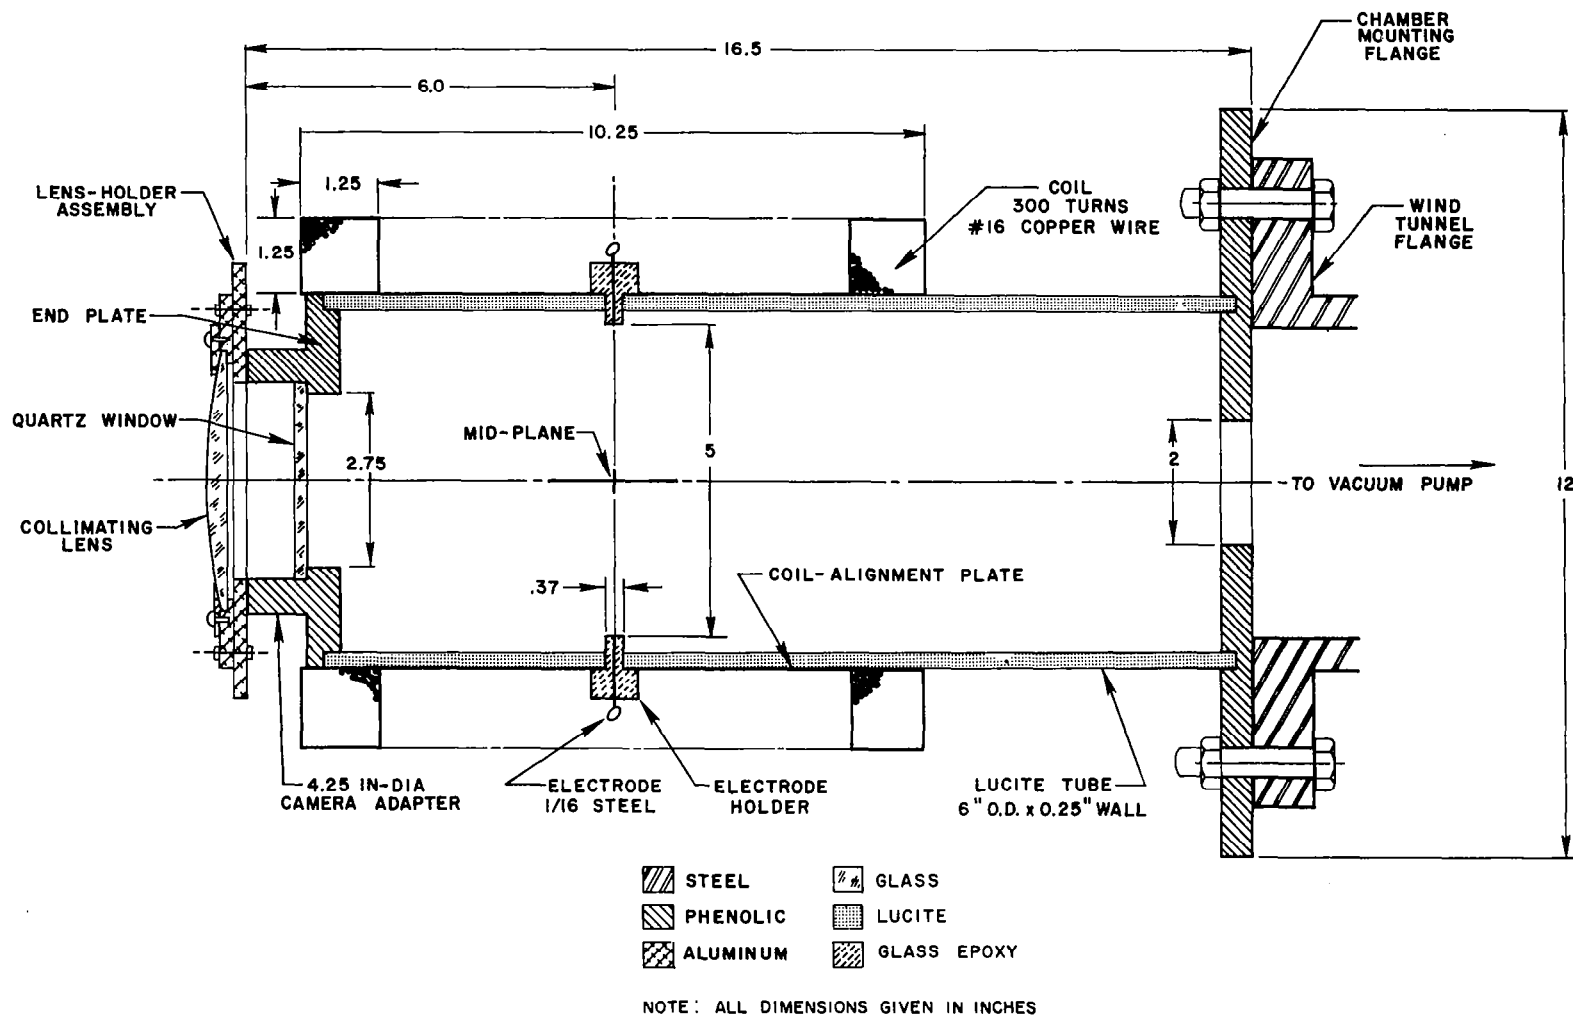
SECTIONAL VIEW OF STATIC-TEST CHAMBER.
